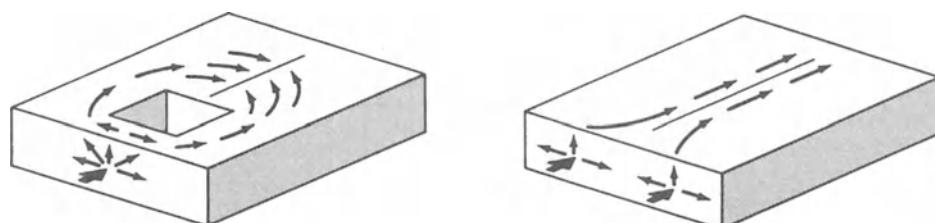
Flow paths are determined by part shape and gate location. Flow fronts that meet head on will weld together, forming a so-called weld line. Parallel fronts tend to blend, usually resulting in a less distinct weld line with a stronger bond.
